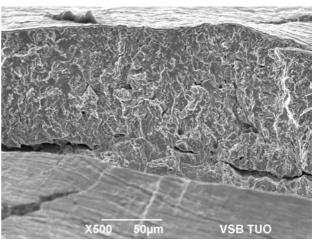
Detail of the fracture surface edge after hydrogen charging - quasi-cleavage fracture. State without heat treatment
